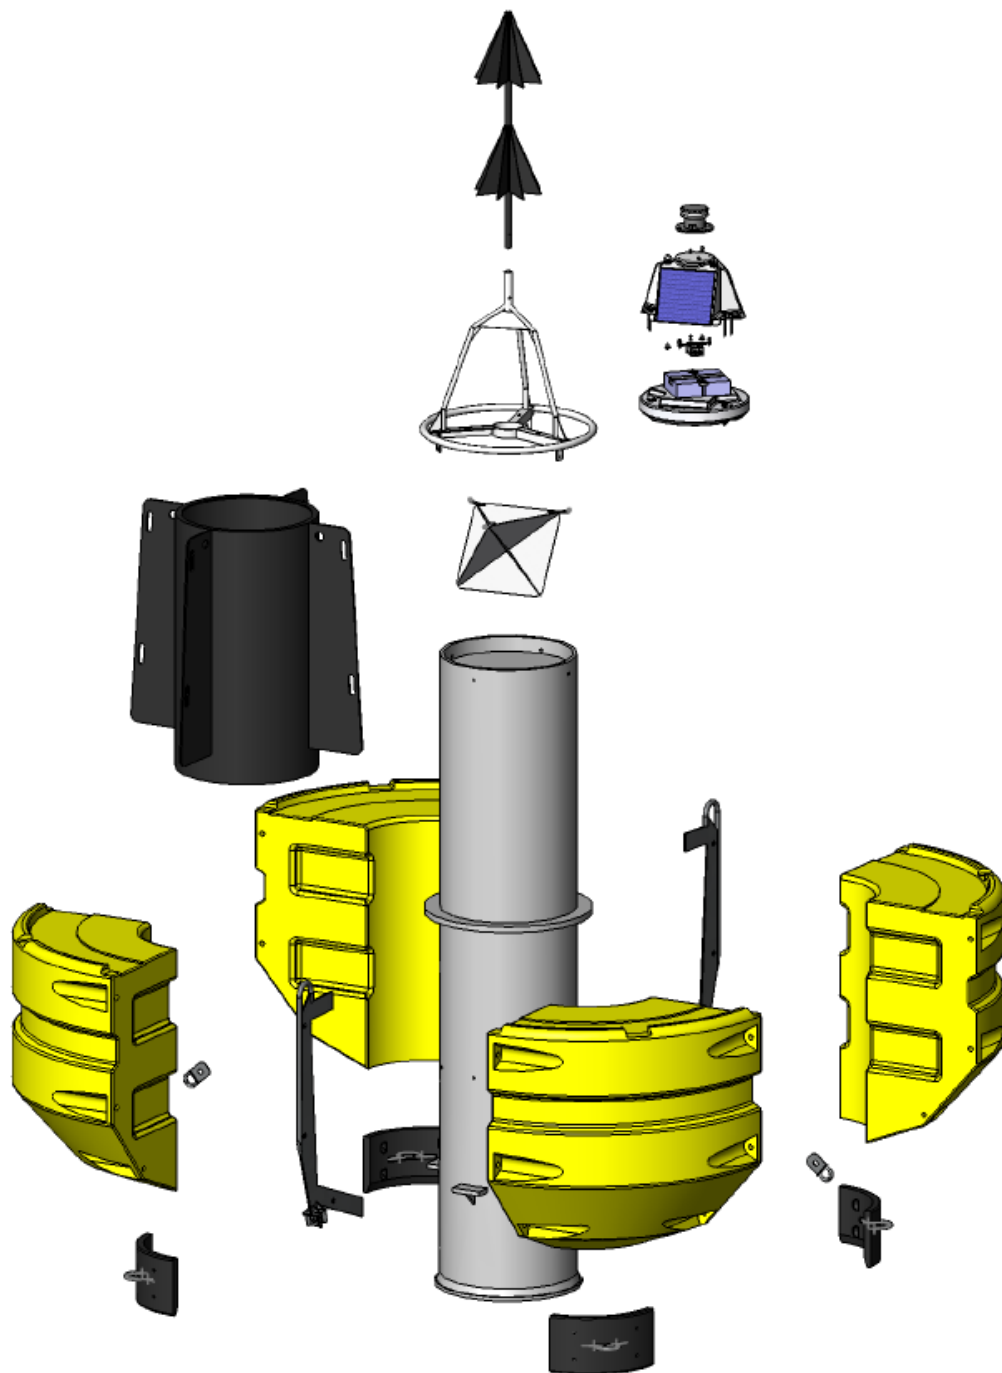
All Polyethylene Modular Buoy (except cast iron ballast and steel mooring and lifting eyes)
